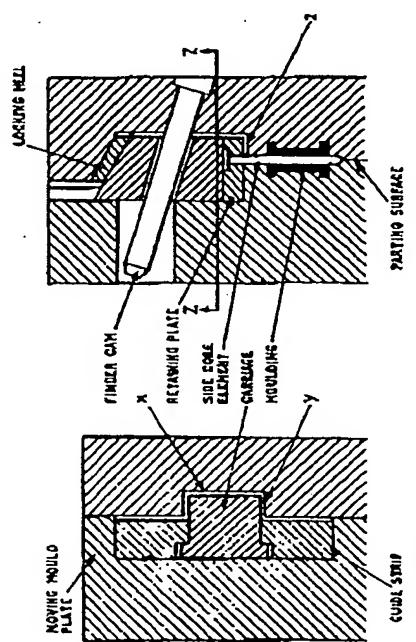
Internal side core assembly. Longitudinal and transverse cross-section through part of mould
